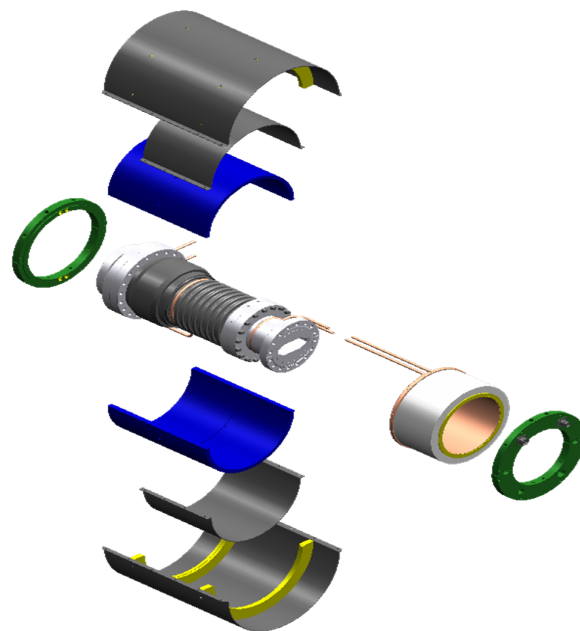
Exploded view of the shielding system designed by SPEAR3.
